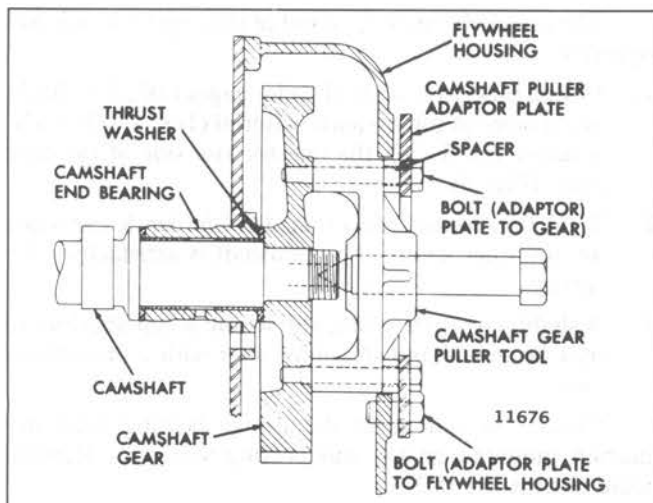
Removing Camshaft with Camshaft Gear Puller J 1902-01 and Adaptor Plate Set J 6202
